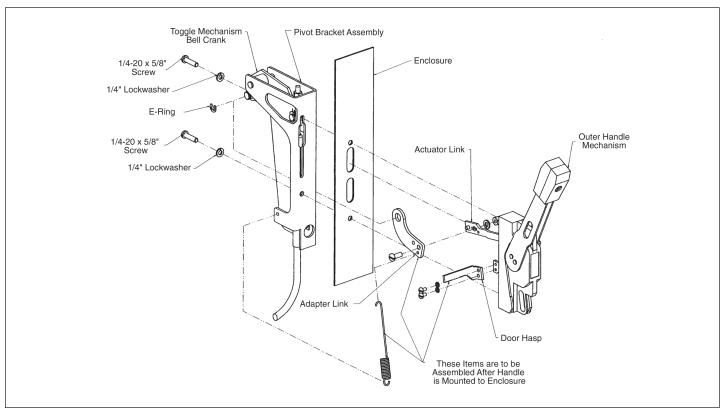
Pivot Bracket and Outer Handle Mechanism Assembly.
